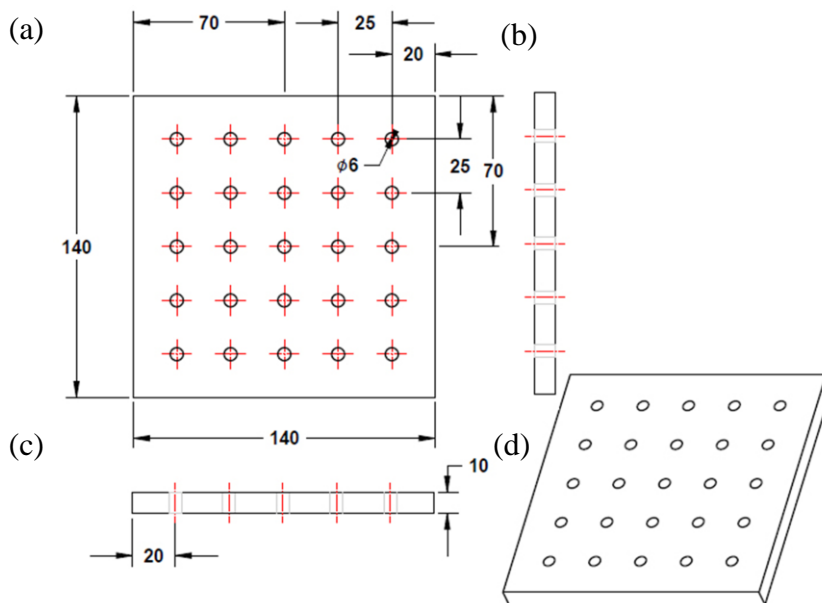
2D drawing of the (a) projected front view, (b) projected side view, (c) projected top view, and (d) three-dimensional CAD model of the top plate for the height adjustment system (all dimensions in mm).
